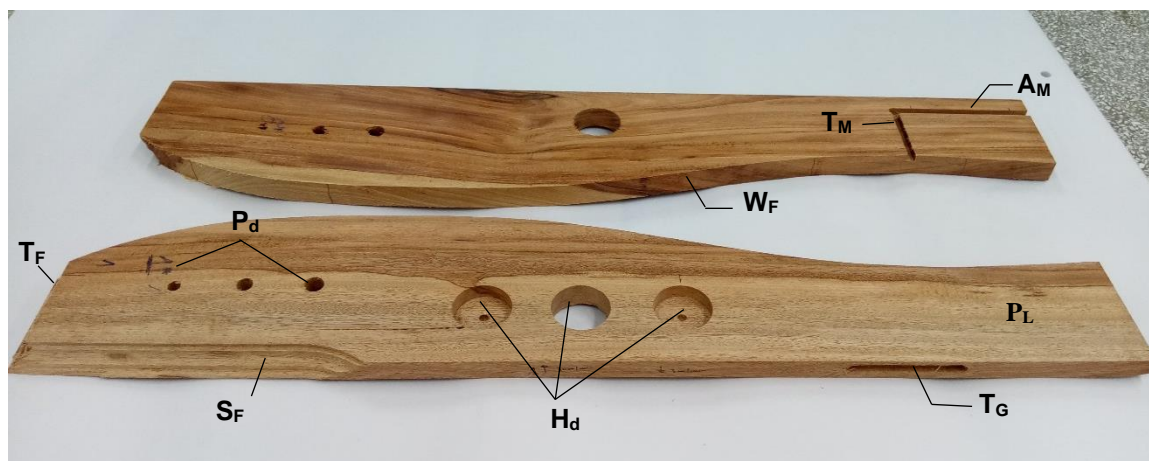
Messassa wood sample in machining test. P_L – Planing; A_M, T_M – Axial and transversal milling; T_F, S_F – Top and side frame; W_F - Winding axial frame; T_G – Tearing; P_d, H_d – Pin and Hinge drilling.
